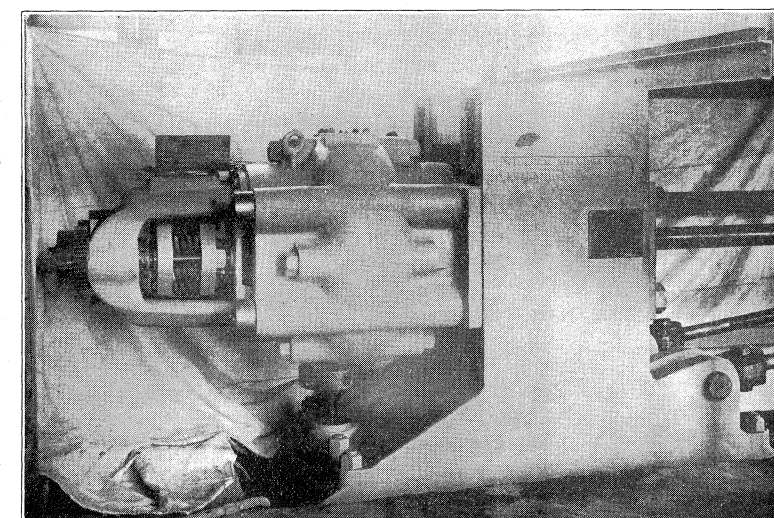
The Weighing Head and the Housing of the Dynamometer.
